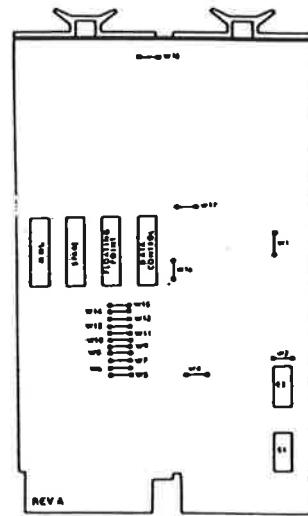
LSI-11/23 Jumper Locations (Rev A)
